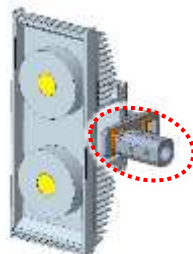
Fixing bar with quick coupling – TT SPARK floodlight set
